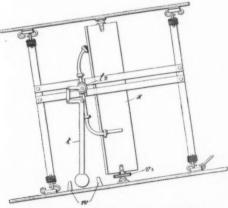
Front elevation of transverse stabilizing mechanism with pendulum.
